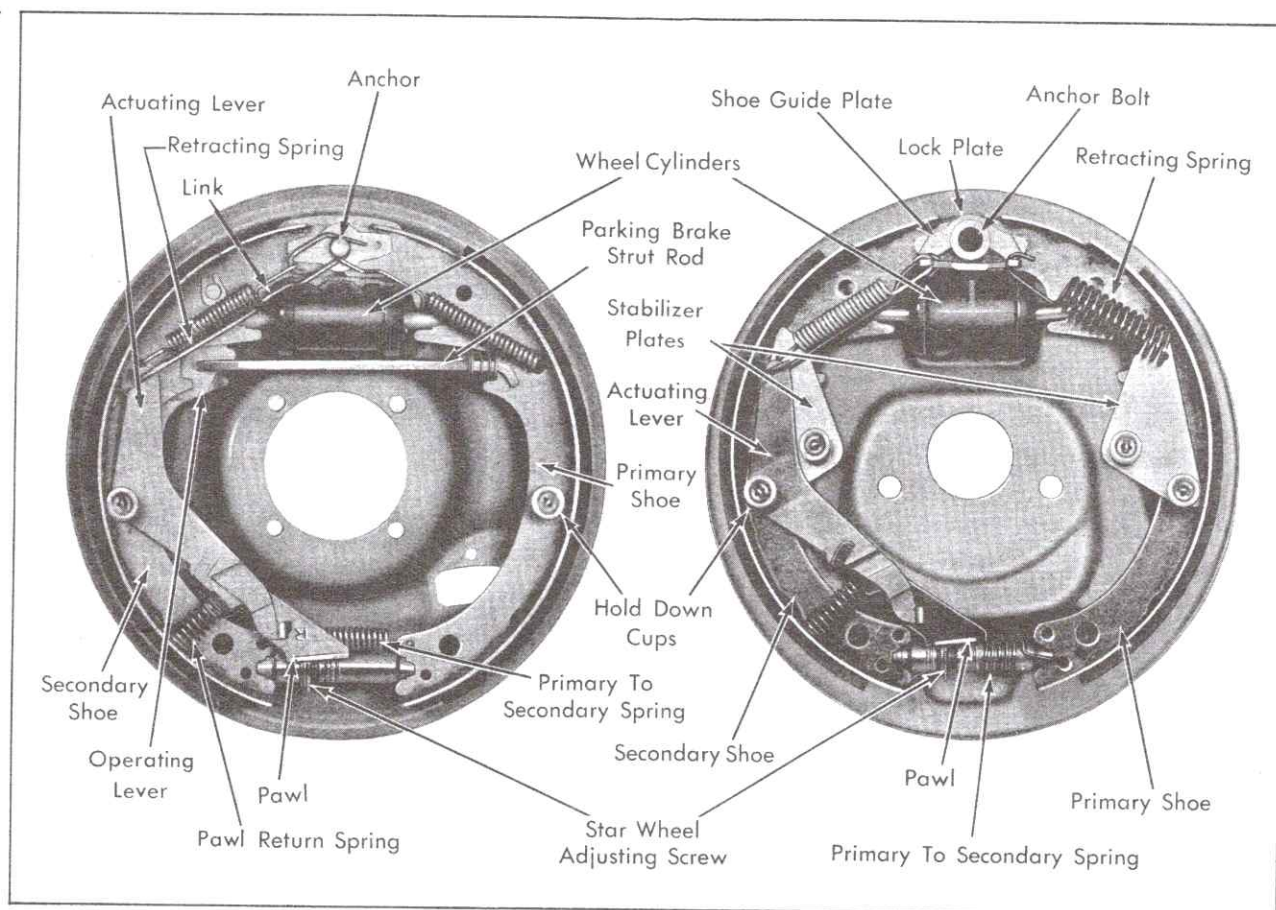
Front and Rear Wheel Brake Mechanisms (Right)
